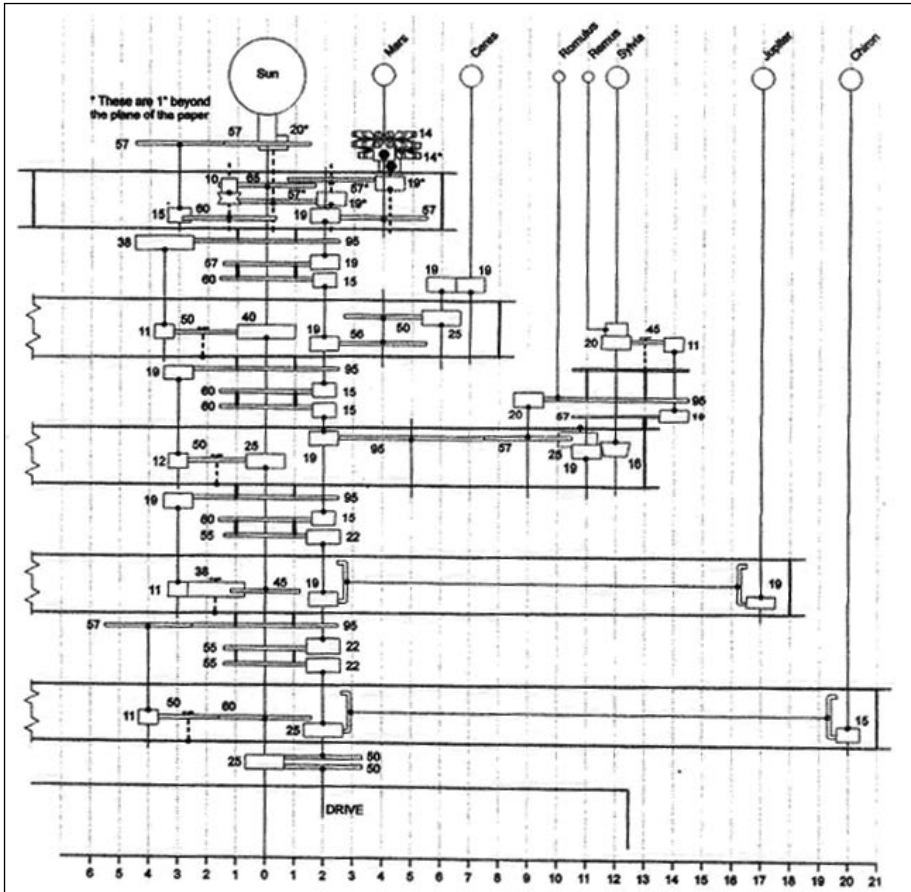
Fast rotating objects (asteroid) - gear layout.
